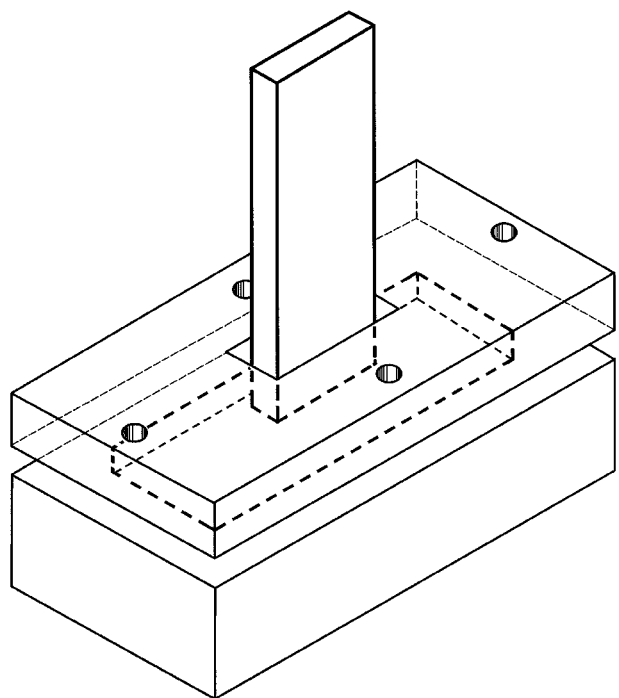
Fixture for determining the strengths of T-joints. The T-joint specimen is clamped between the top $51 \times 102 \times 12.7\text{-mm}$ slotted plate and the bottom 25.4-mm -thick plate by means of four 6.35-mm -diameter bolts.
